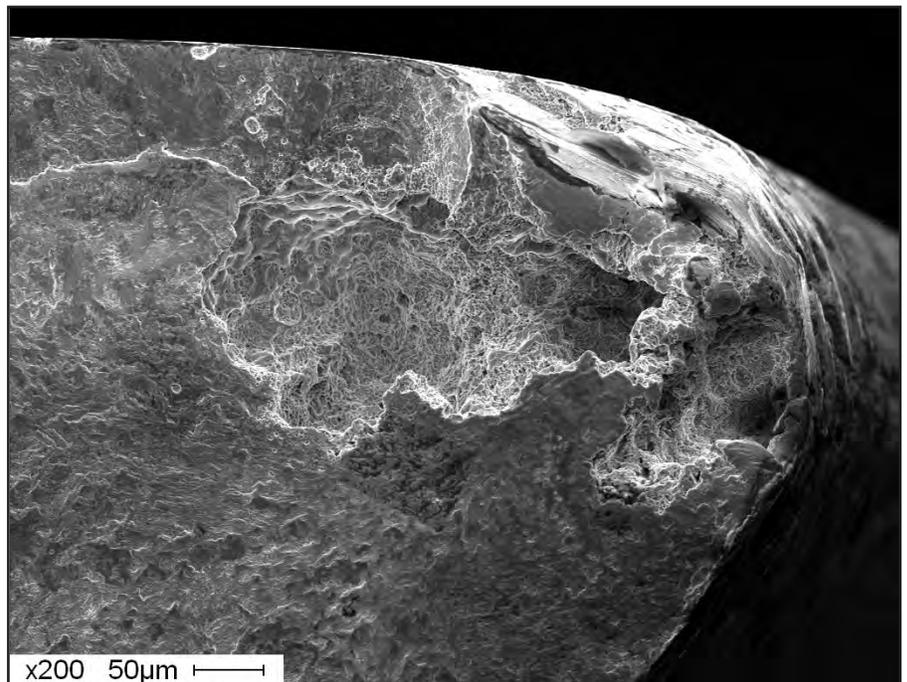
Closer view of leading edge chloride pitting and resultant fracture on GE 7FA vane .
